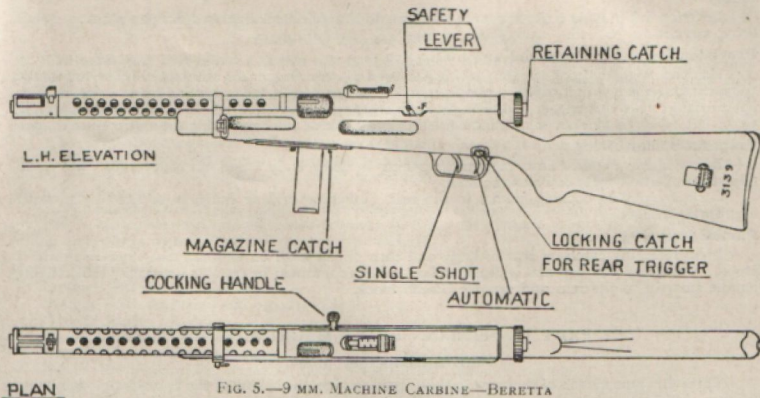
9 MM. MACHINE CARBINE—BERETTA
